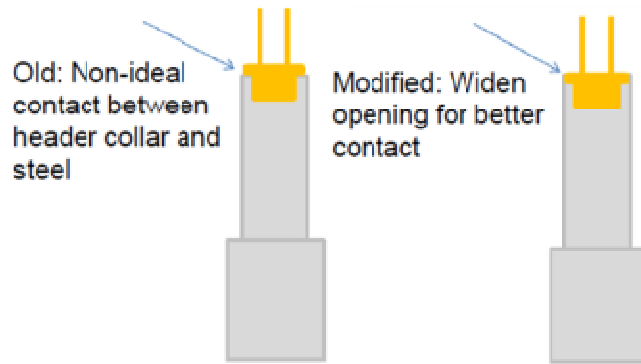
Modification of the seating of TO Header and Steel Case to improve the contact area of the sub-assembly.
